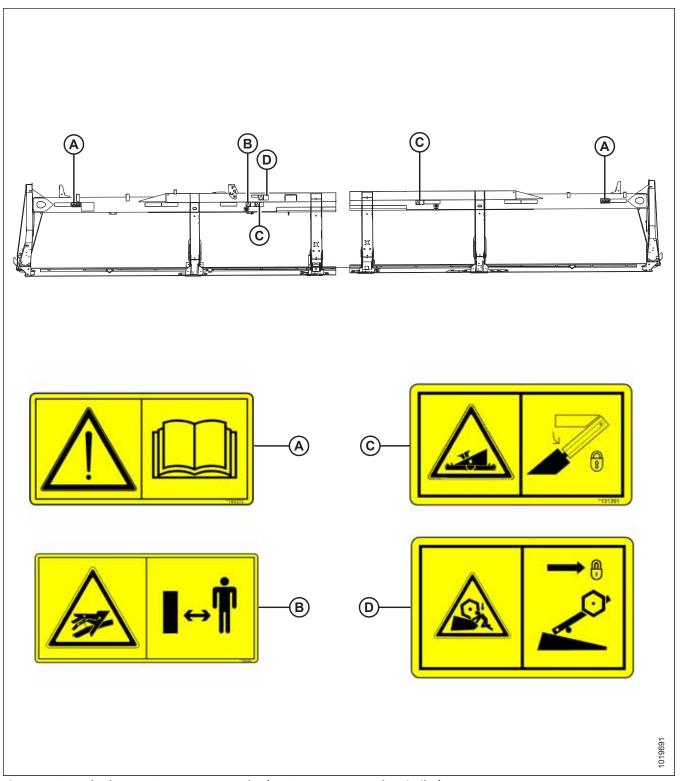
Backtube – D135XL Draper Header (D130XL Draper Header Similar)
